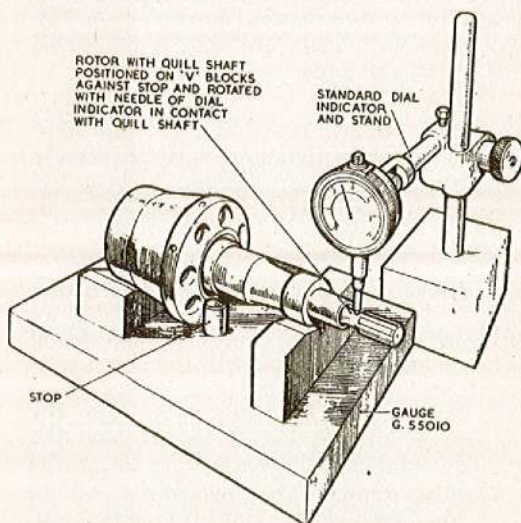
Concentricity check of quill shaft in rotor, using gauge G.55010
